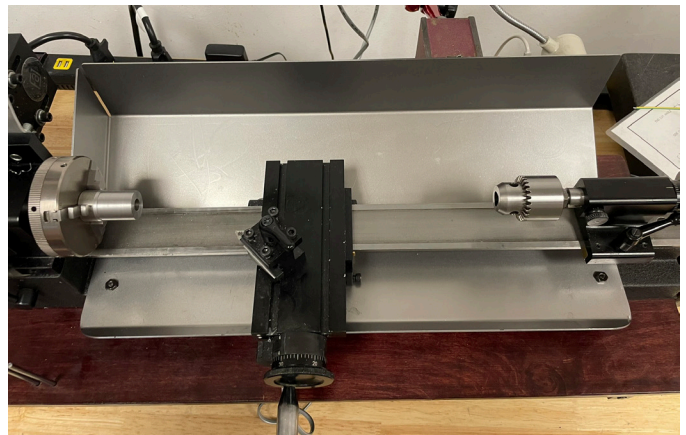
The backsplash mounted to the lathe and ready for turning a project.
